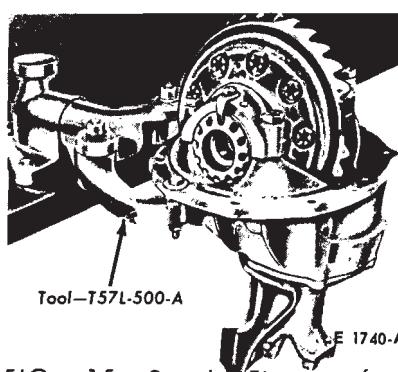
Bench Fixture for Removable Carrier Overhaul—Typical
